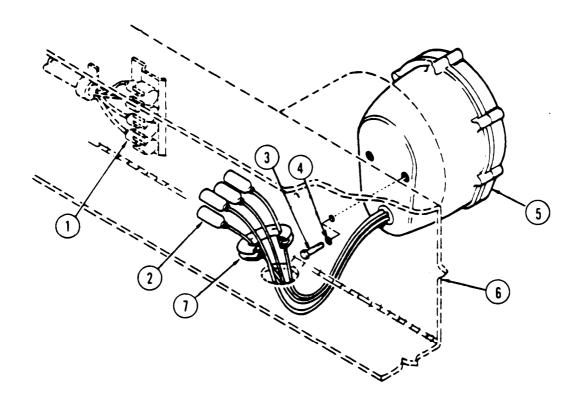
Trailer Composite Tail, Stop, Turn, and Marker Light Assembly (ARMY)
